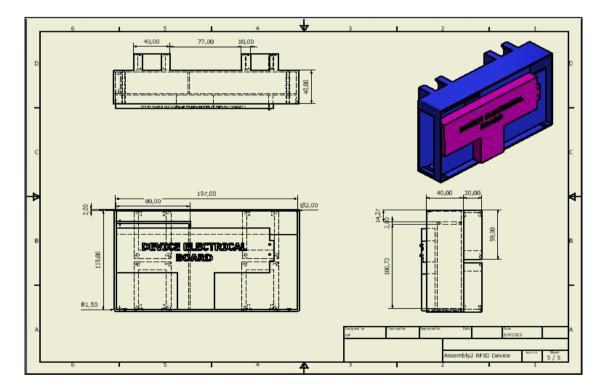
Orthographic Projection of the RFID Device bottom part with its full dimensions.
